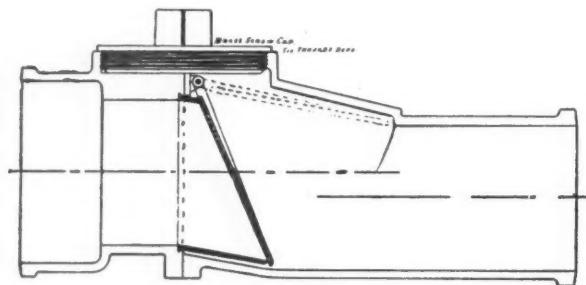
SECTIONAL VIEW OF INDEPENDENT TRAP.
